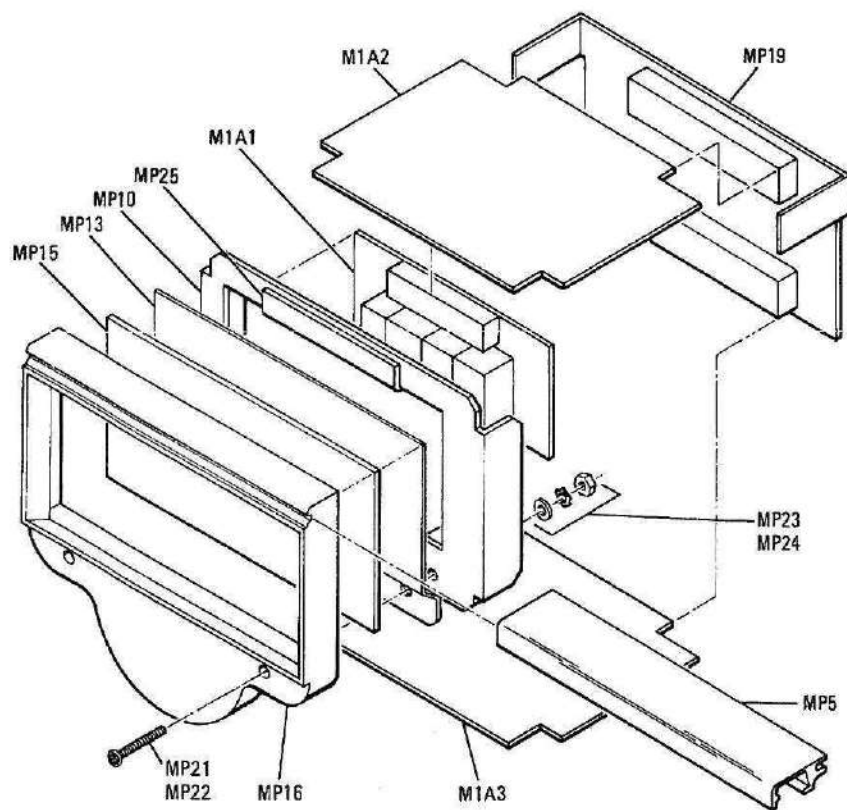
Panel Meter Components, Exploded View (P/O Change N)
